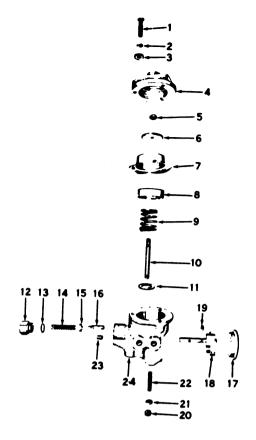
Aneroid, removal, disassembly, reassembly, and installation (sheet 1 of 2).
